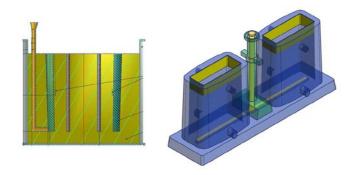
Manufacturing setup for the ingot mold casting in a sand mold (left sectional view) & manufacturing setup of a twin-cavity ingot casting process (right).
